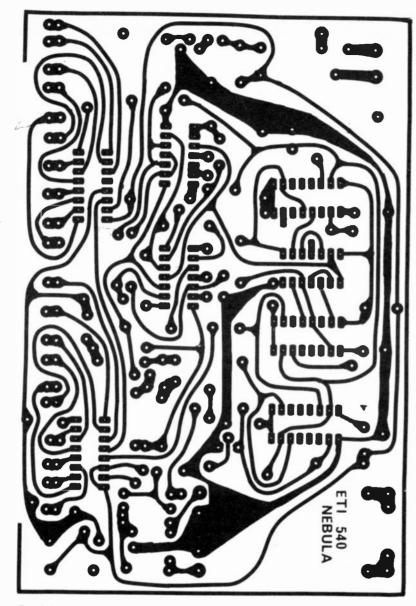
Printed-Circuit board layout for the timer. Full size 153×100 mm.
